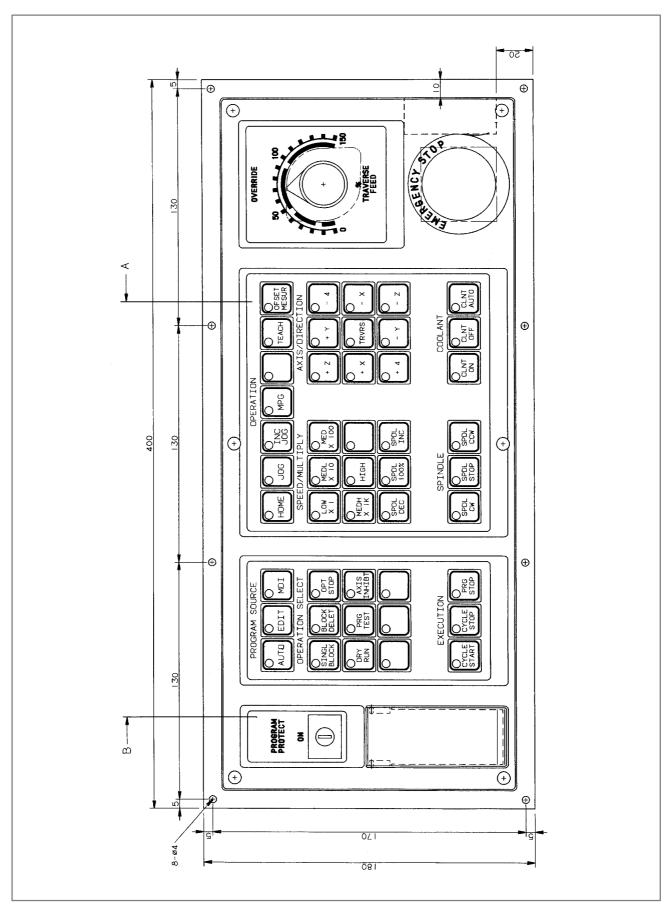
(b) Front view of machine operator's panel for small unit (M series)
